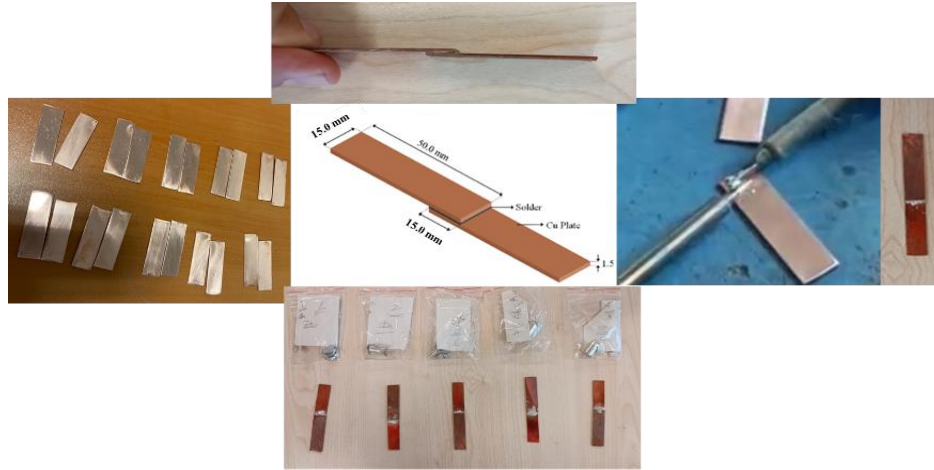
Shows Cu-substrate dimensions and the process of soldering.
